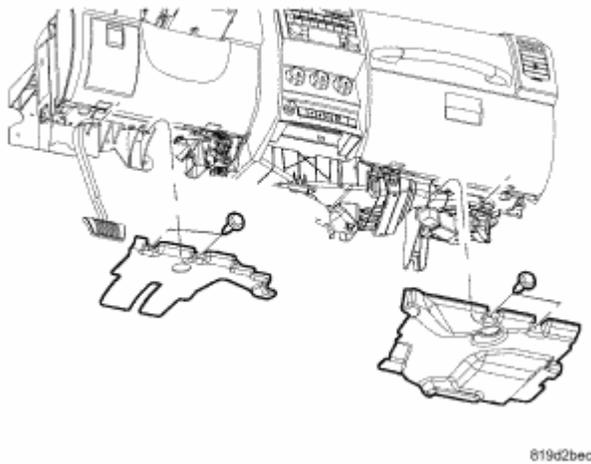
Removing/Installing Fasteners And Close Out Panels
